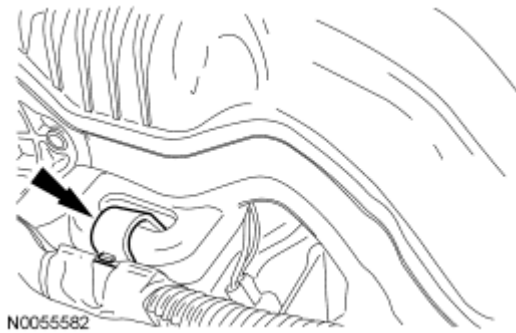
Identifying Block Heater Wiring Harness Retainer From Upper Intake Manifold
